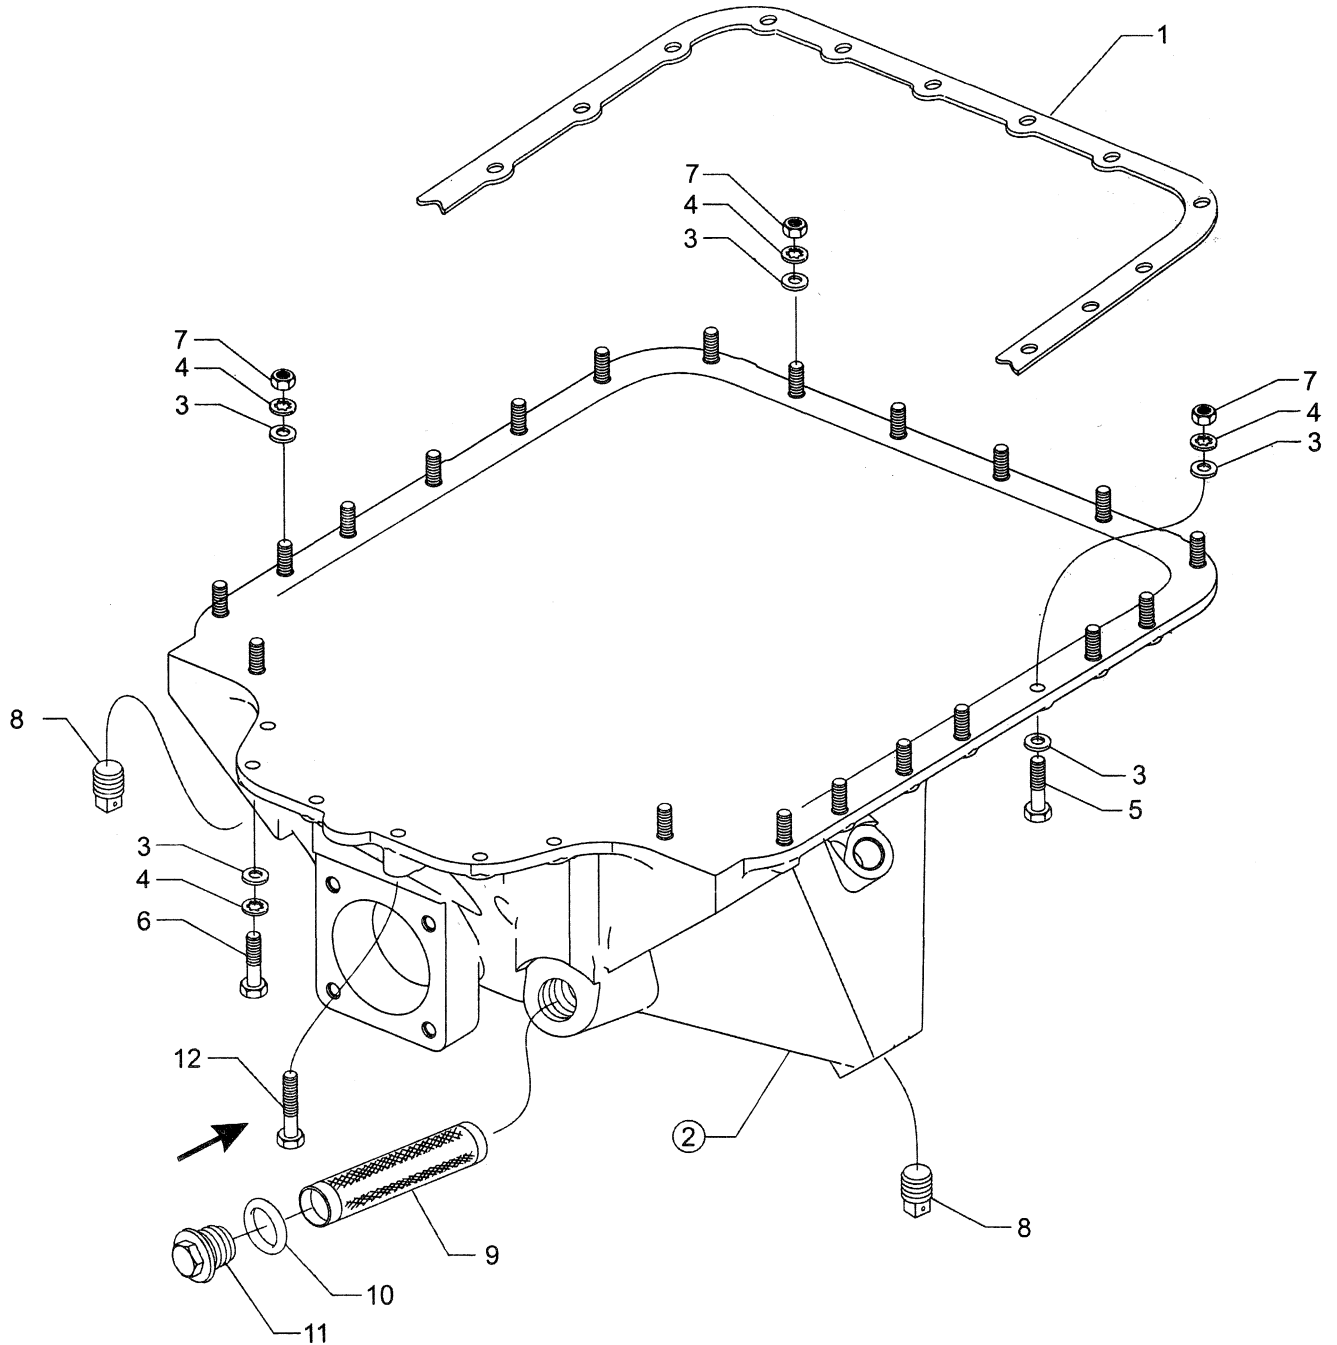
OIL SUMP ASSEMBLY AND OIL SUCTION SCREEN
